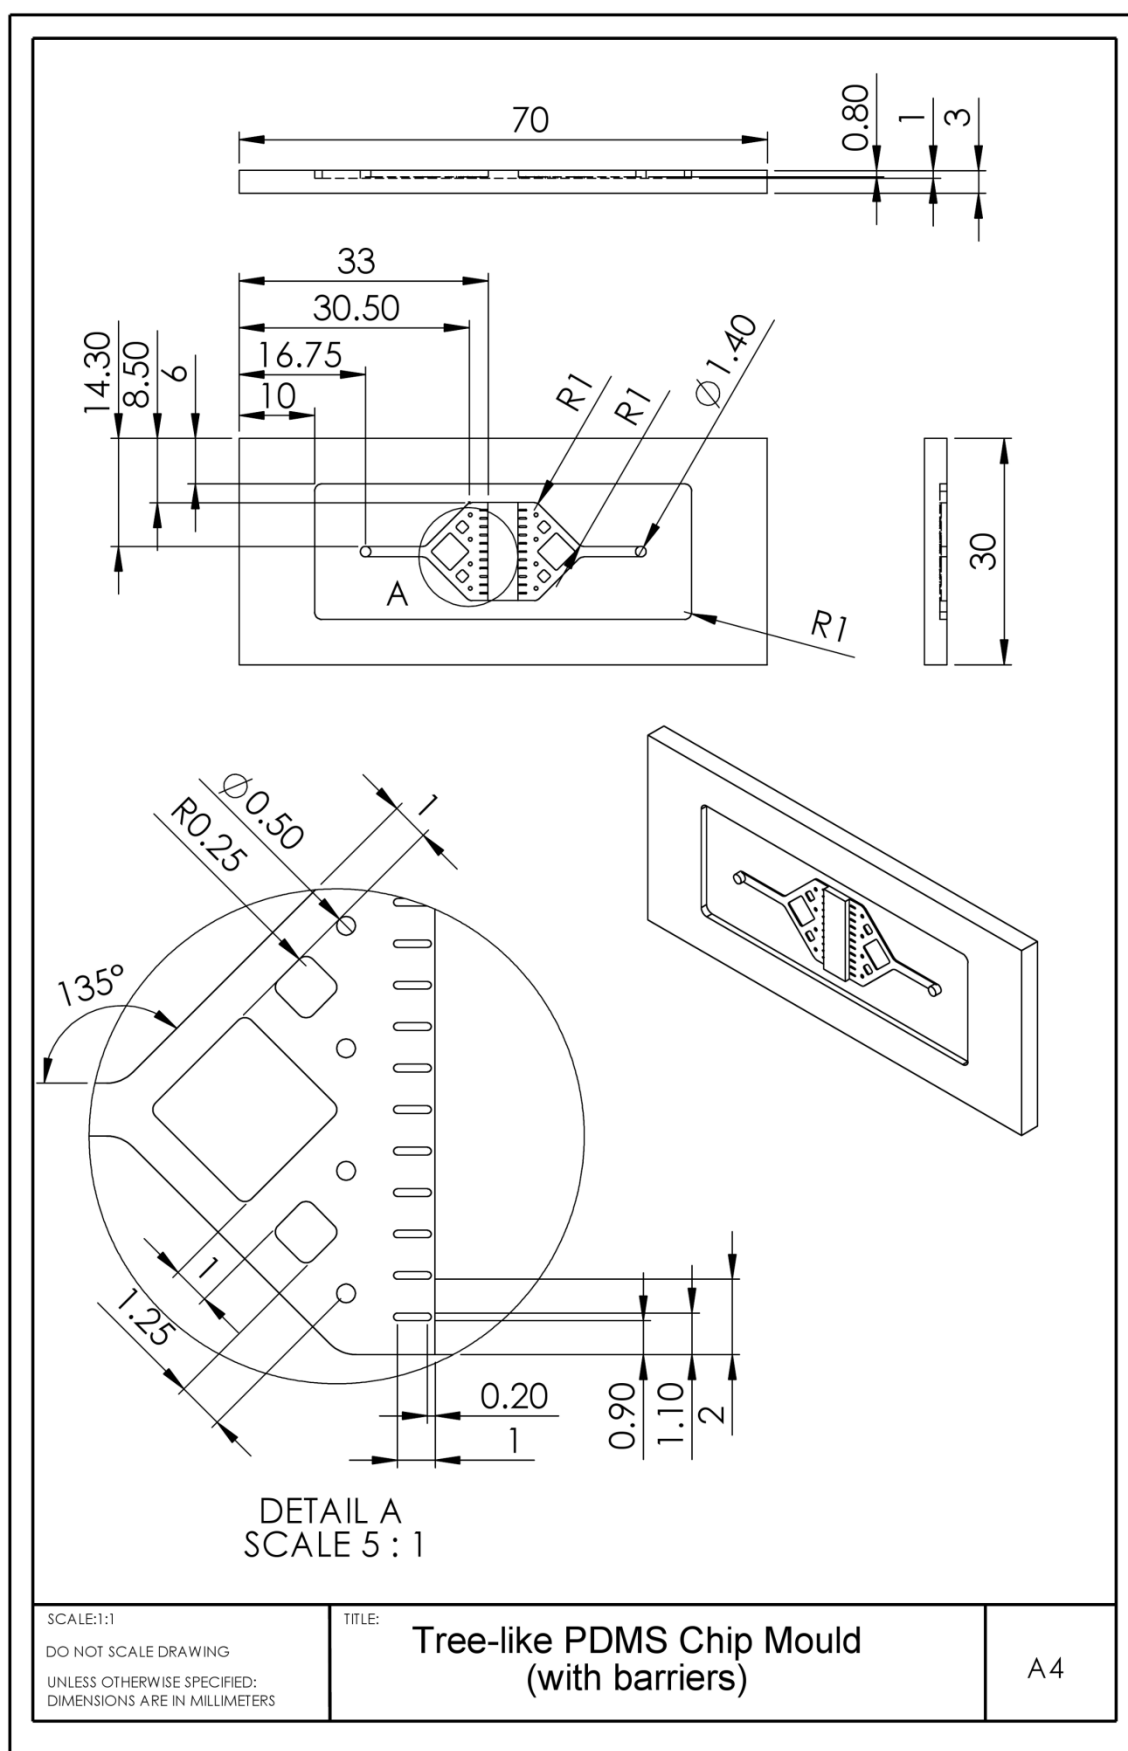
Technical drawing of mould for tree-like PDMS chip.
